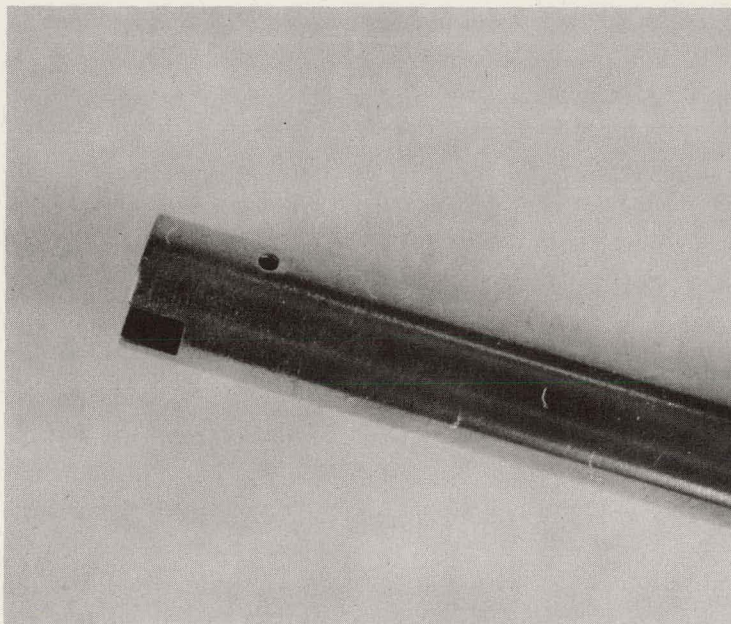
Typical End Cap Weld on Fuel Rod Using Plug Cap with Vent Hole
